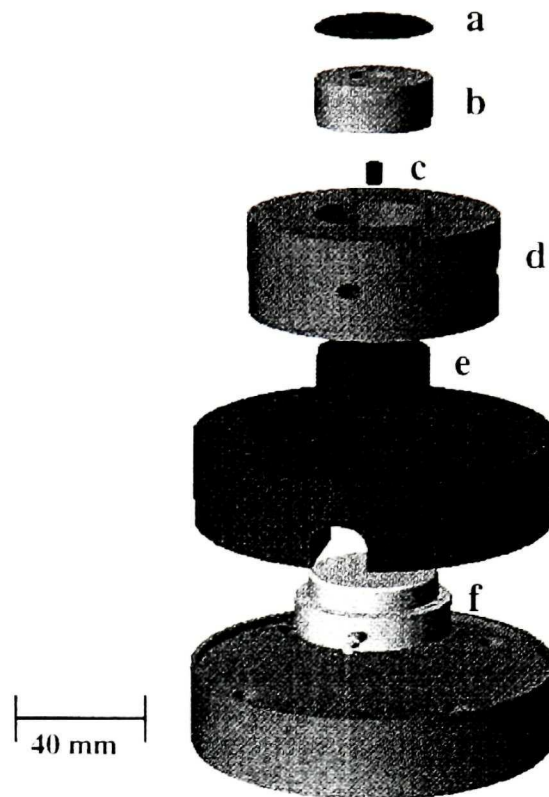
Exploded view of the die-set assembly for the DWT including: (a) die protection cap, (b) upper die, (c) test specimen, (d) die sleeve, (e) lower die, and (f) load cell.
